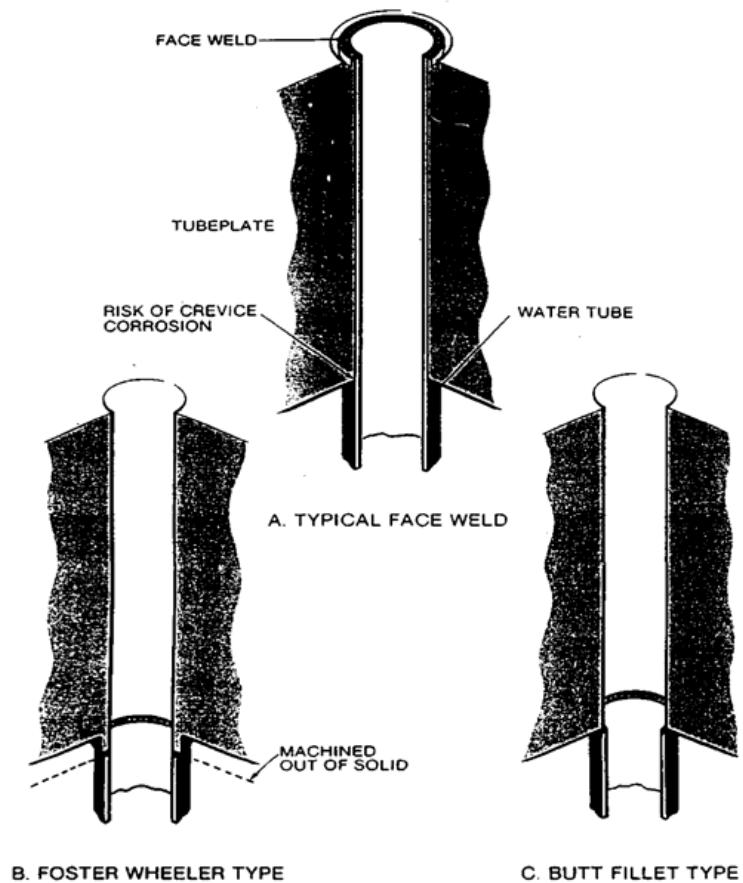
Steam generator tube/tubeplate weld style.
